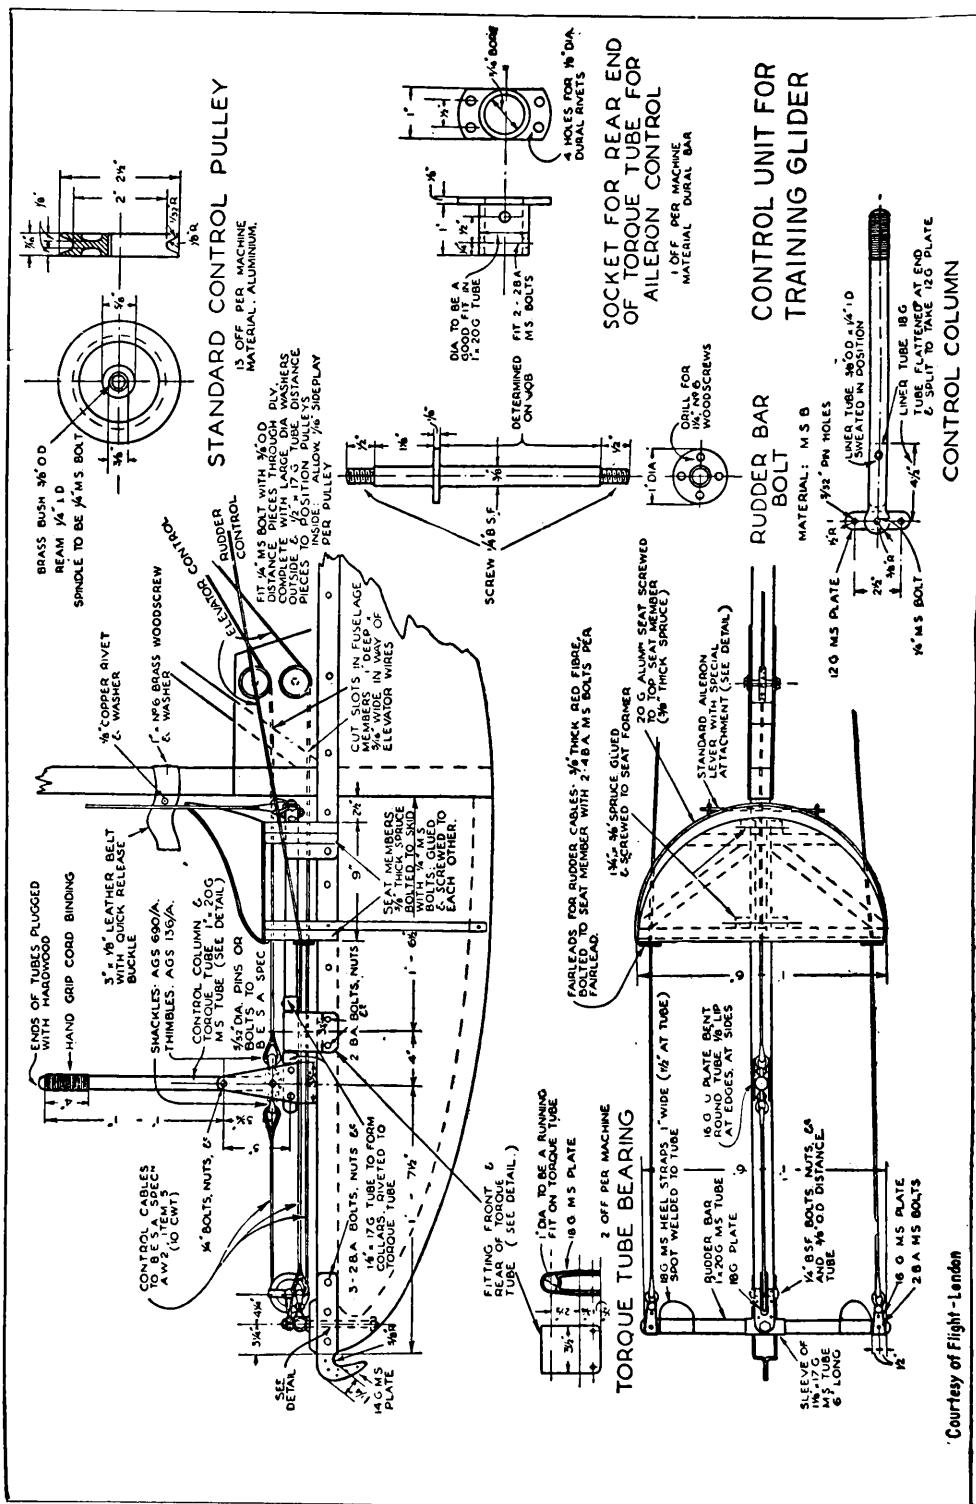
Control Unit for the Dickson Training Glider. Note Arrangement of Seat, Control Stick and Cable Guide Pulleys, also Location of Rudder Bar and Towing Hook.
